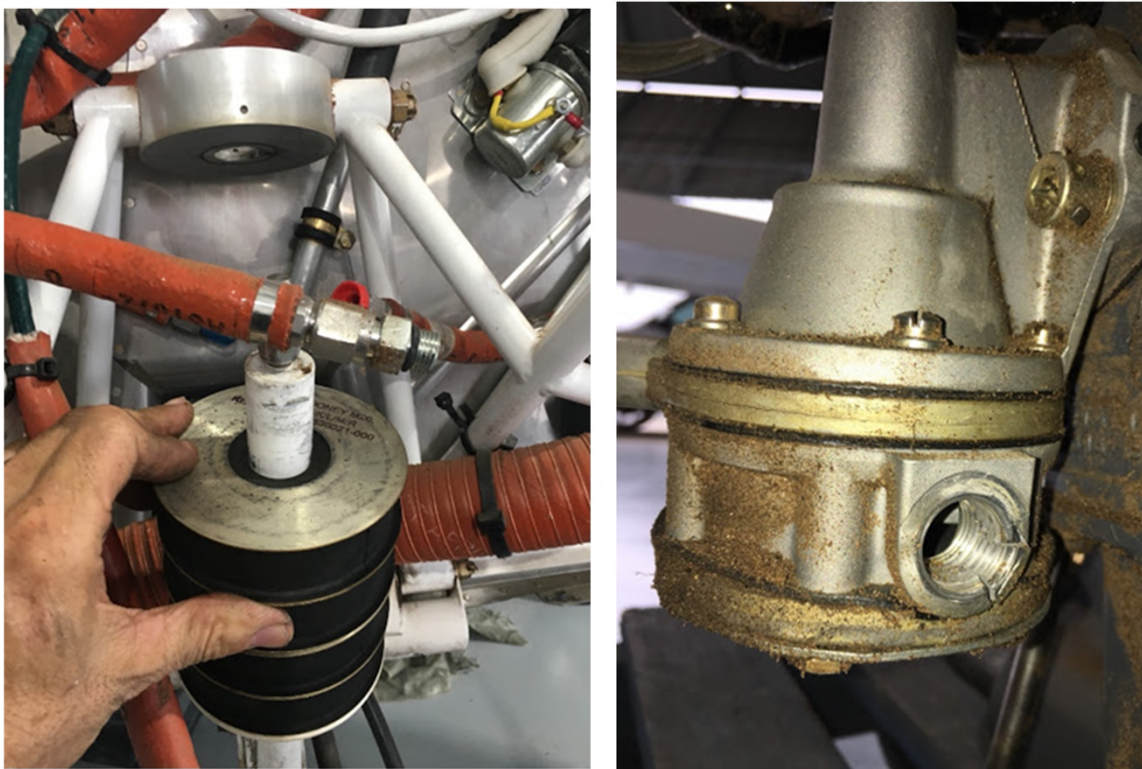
SEVERED FUEL PUMP INLET FITTING DUE TO NOSE GEAR COLLAPSE DURING EMERGENCY LANDING
